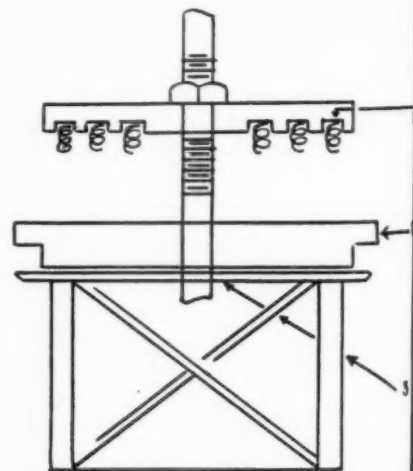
Air valve assembly—1. Cup grease holds spring. 2. Valve with discs in place. Valve stand is drilled for bolt.
